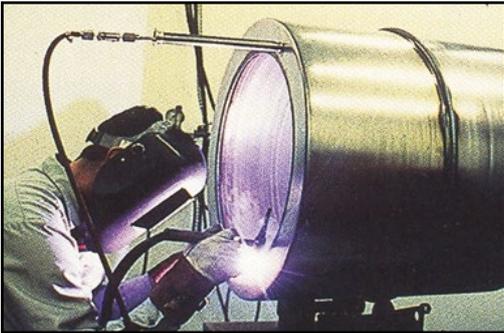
Welding of a 2000 kg container (courtesy Bodycote)
